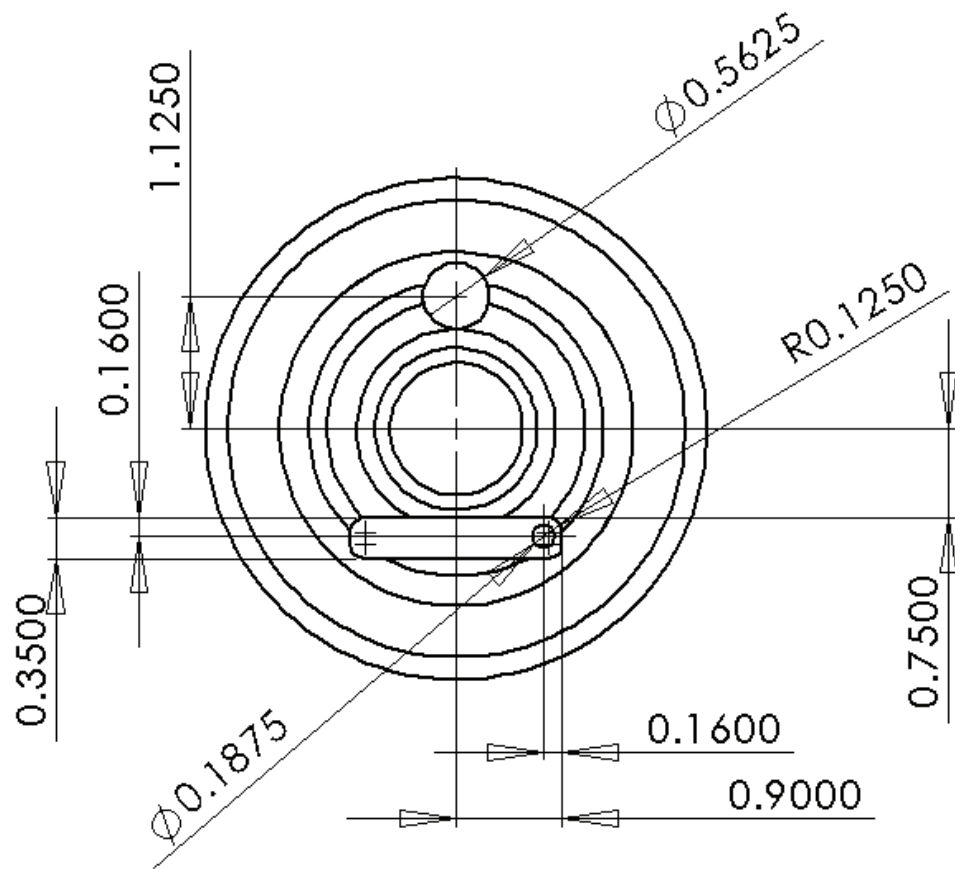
Mechanical drawing of the inside of the part *right hub.sld
